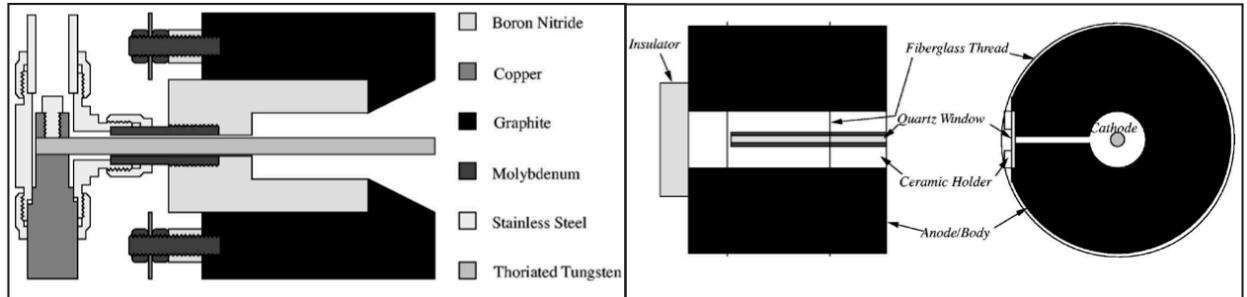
Schematic drawing of the thruster. The right panel shows the side and front views of the radial slot used for optical access to the plasma in the discharge chamber. From Ref. [9].
